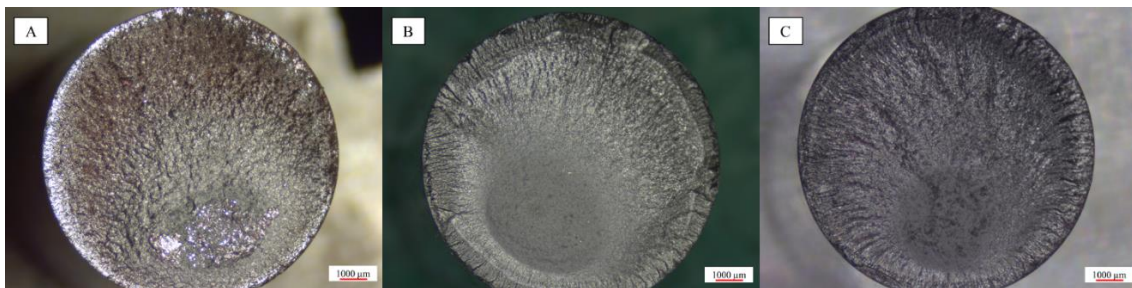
Shaft fracture surfaces: A) steel shaft coupled under 80 MPa pressure, fatigue stress amplitude 270 MPa. B) aluminum shaft coupled under 40 MPa pressure, fatigue stress amplitude 180 MPa. C) aluminum shaft coupled under 80 MPa pressure, fatigue stress amplitude 140 MPa
